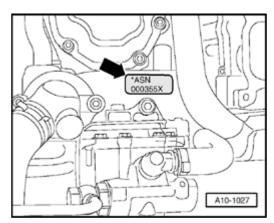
Identifying Engine Code Are Located At The Front Of The Cylinder Head, On Top Courtesy of VOLKSWAGEN UNITED STATES, INC.
